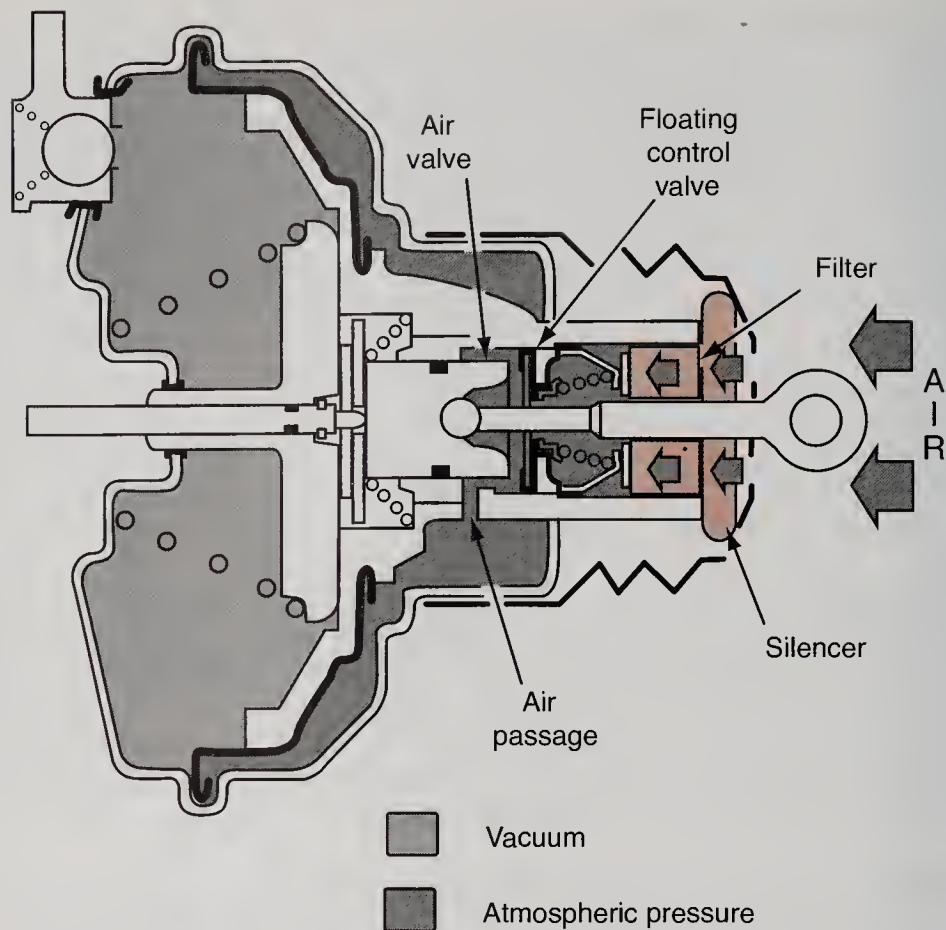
Air fills the rear chamber when brake application opens the air valve and closes the vacuum valve. The front chamber is kept in vacuum.
